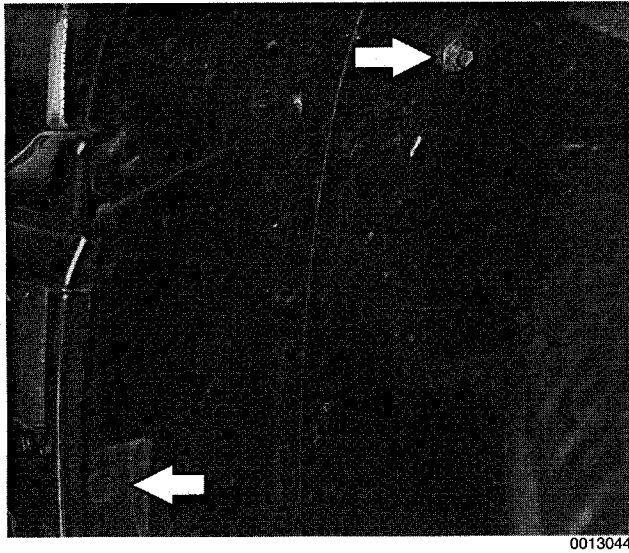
Bumper cover retaining screws (arrows) in left wheel well.
